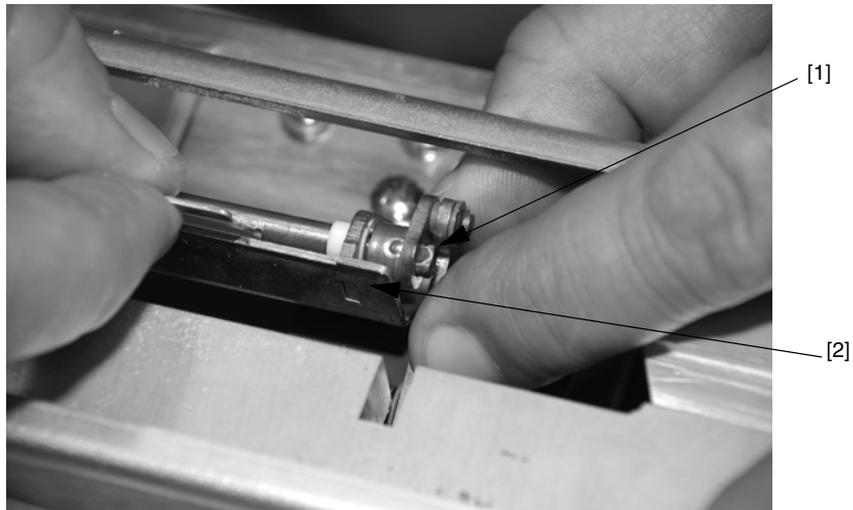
Testing for Broken Paddle Weld.
